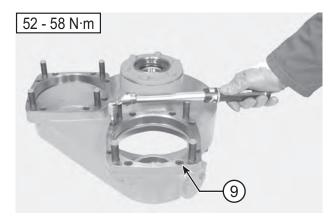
Tighten screws (9) using a torque wrench setting of $52 - 58 \text{ N} \cdot \text{m}$.
